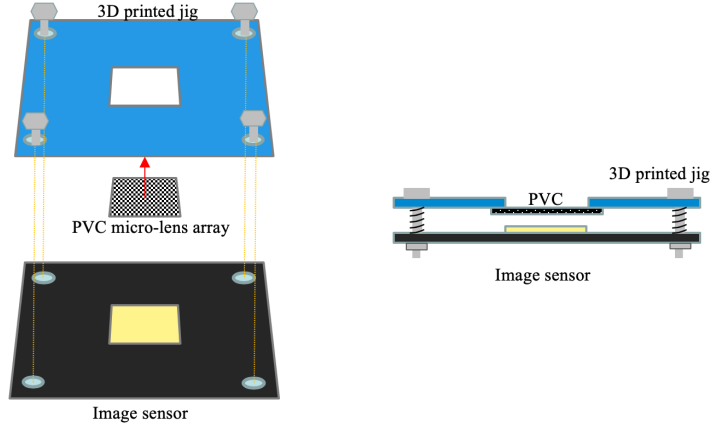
The schematic of the imaging system setup using 3D printed jig.
